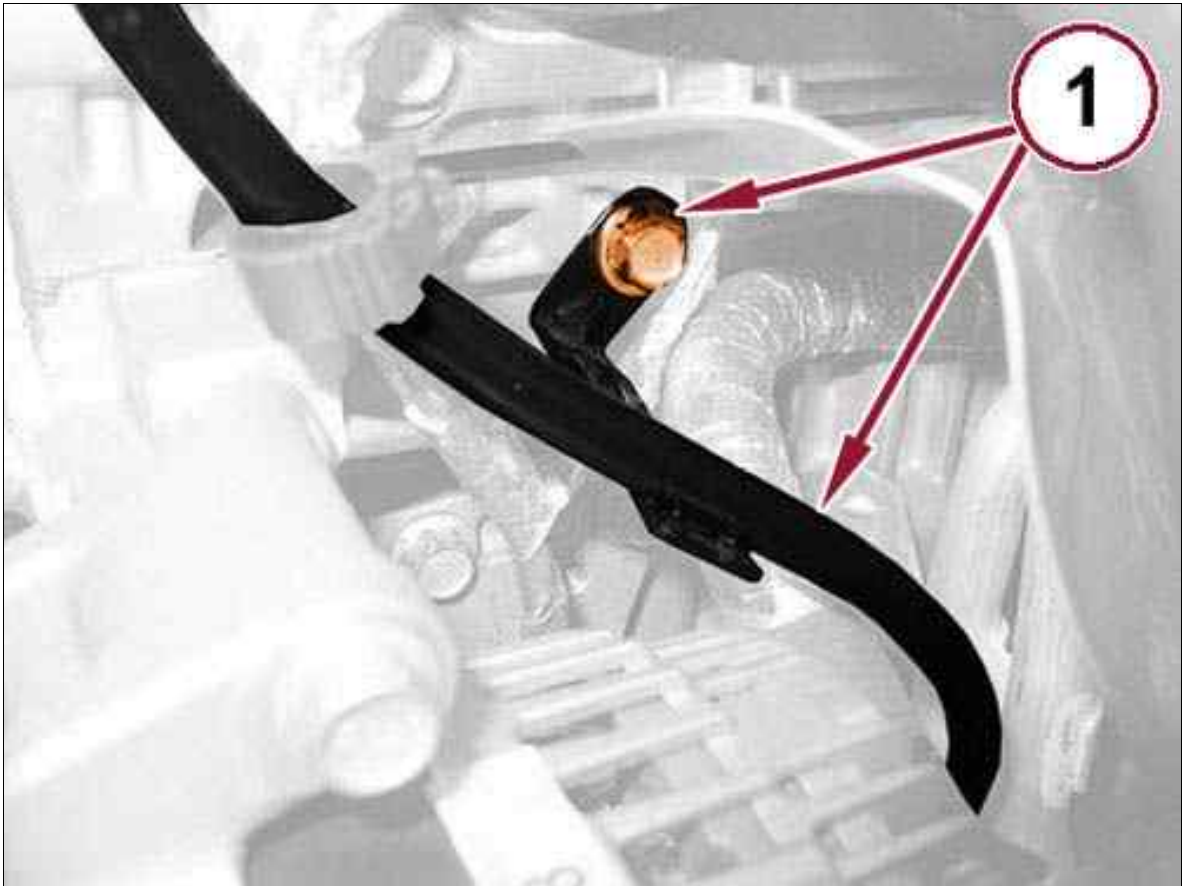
Accessory Drive Belt Idler Pulley & Bolt
